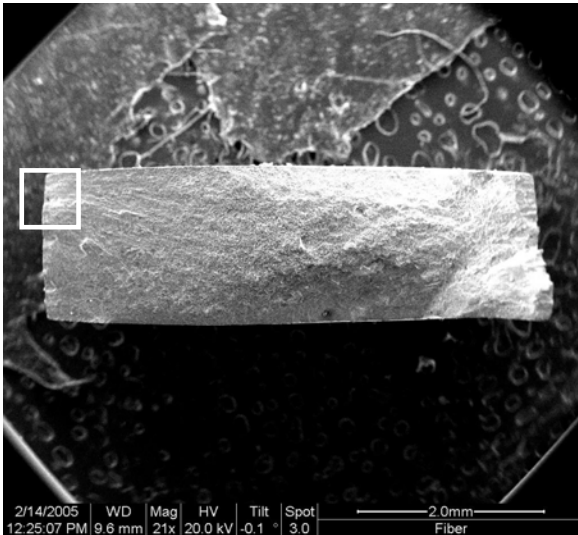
Specimen F/G-04, overall view of fracture surface
